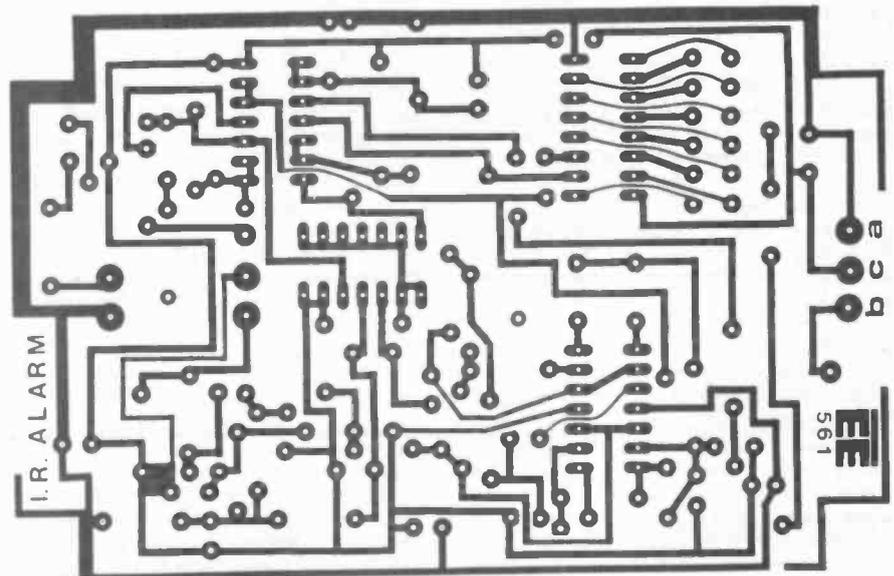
Full size printed circuit master pattern for the Infra Red Alarm—Detection Head.
